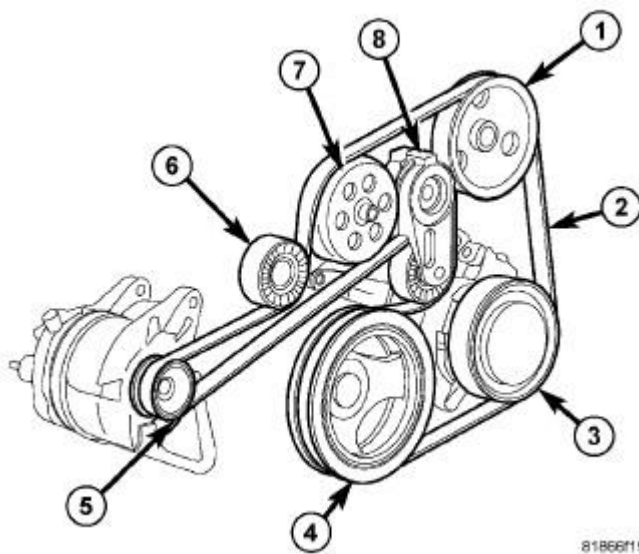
Accessory Drive Belt Routing, Tensioner & Pulleys
